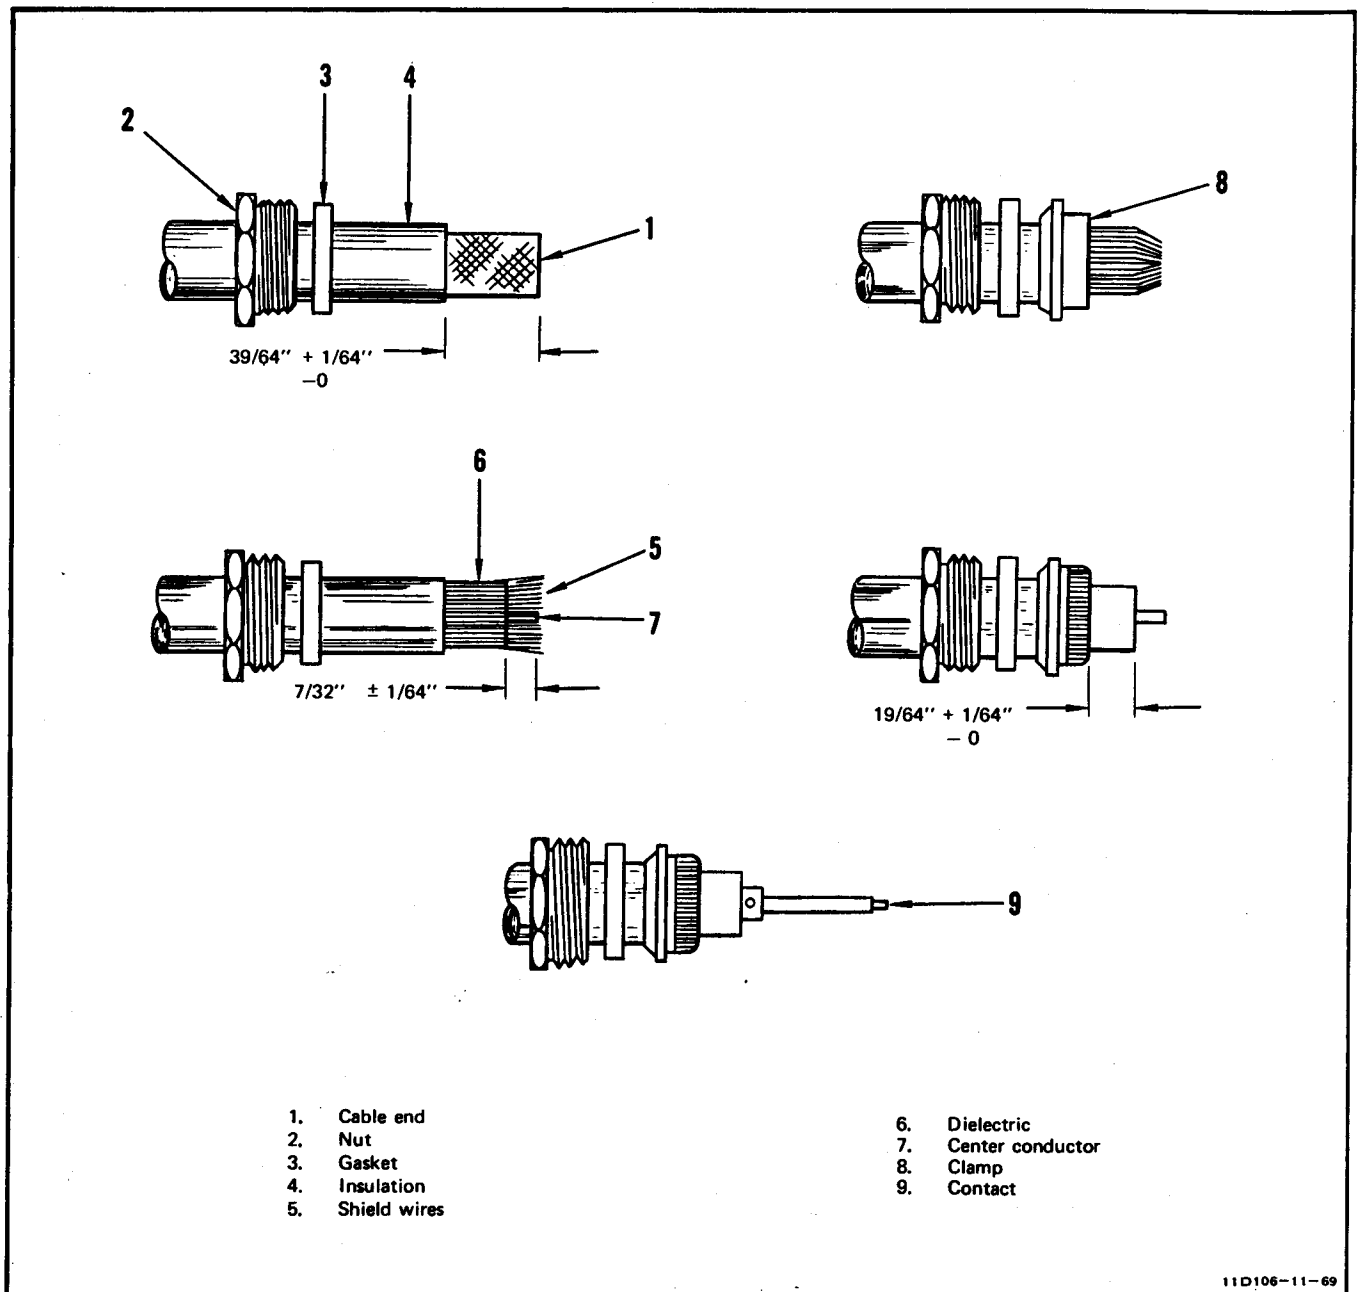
HN Series Coaxial Connectors - Improved Contact Repair
